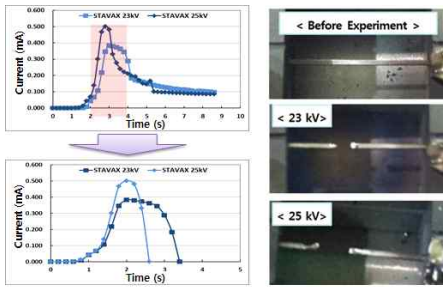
Probe current profile through workpiece and photograph of melted workpiece of STAVAX
